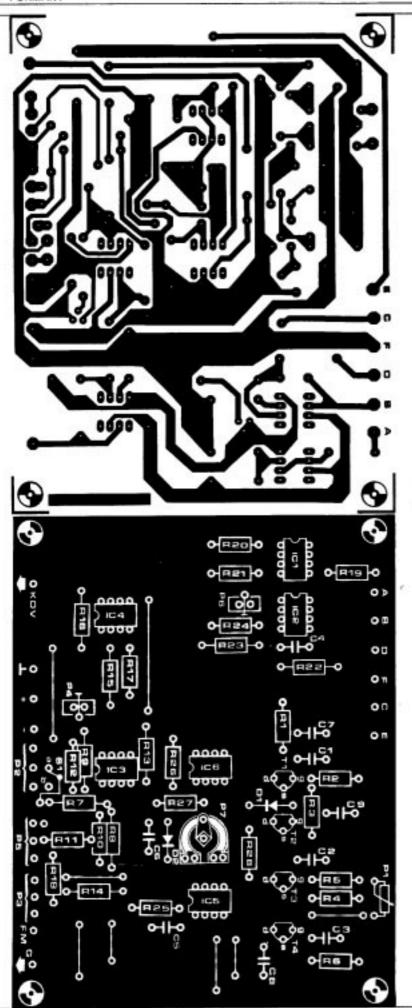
Printed circuit board and component layout for the keyboard interface circuit. (EPS 9721-1)
